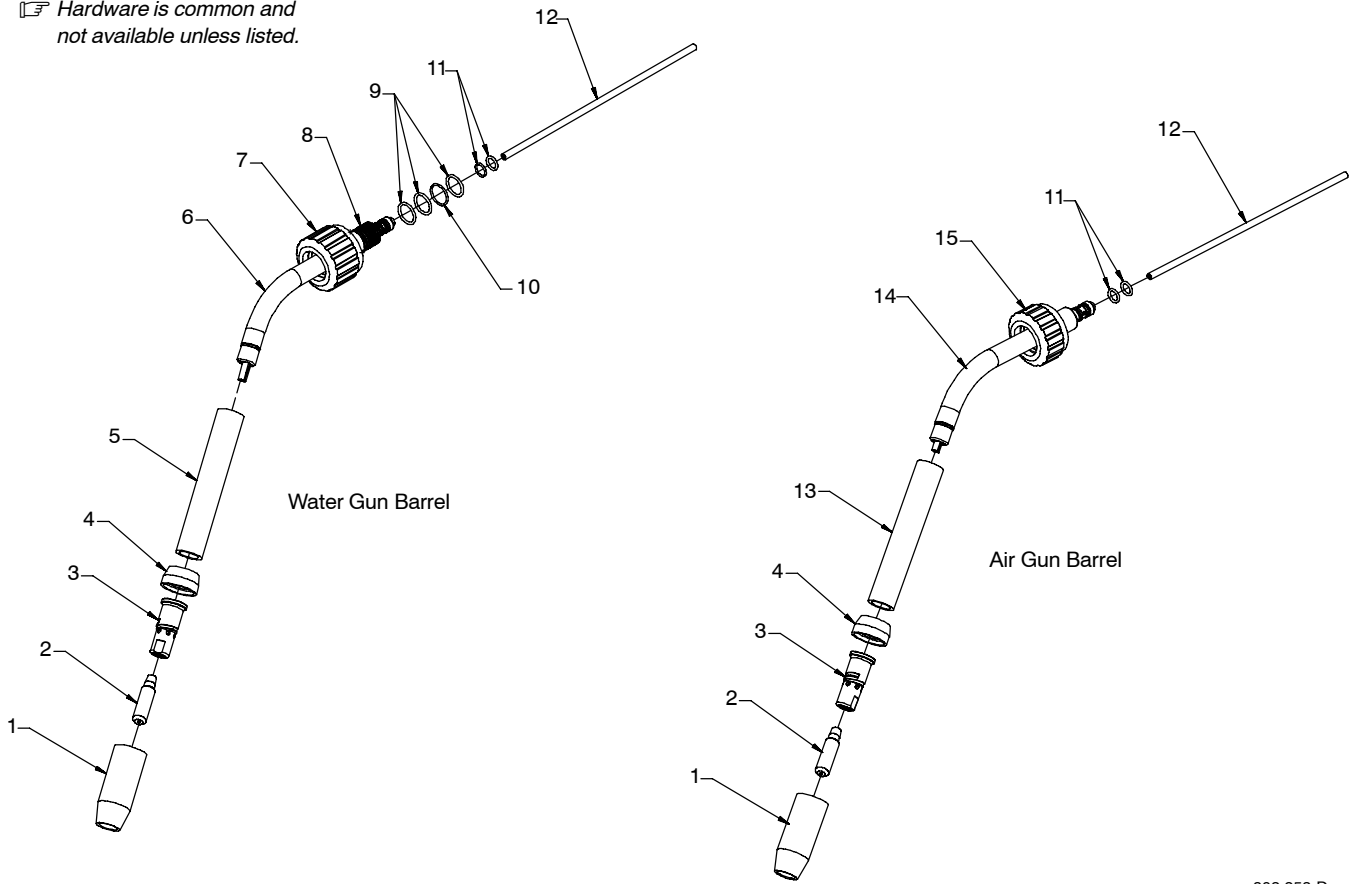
Exploded View Of XR-Edge Gun (Continued)
